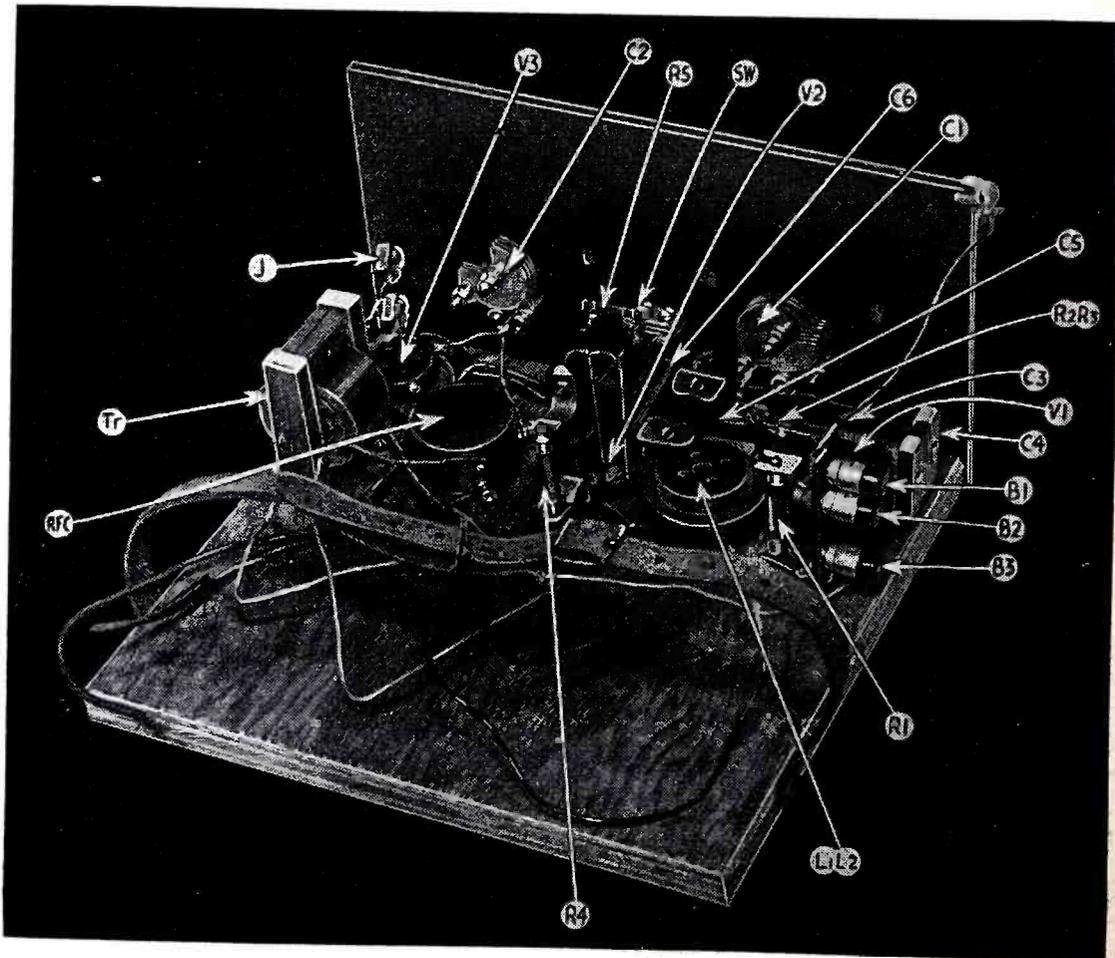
Fig. B. Rear view of the "Craft Box." All the parts, few in number, are easily seen. What parts would YOU use?
